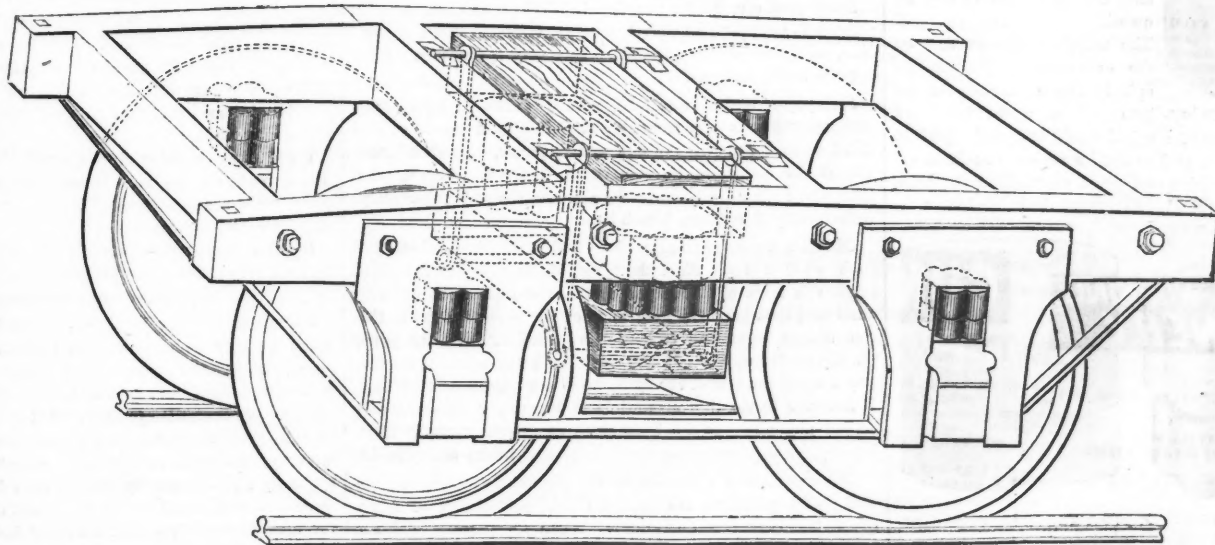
THE UNION WOOL-PACKED STEEL SPIRAL SPRING AS APPLIED.
